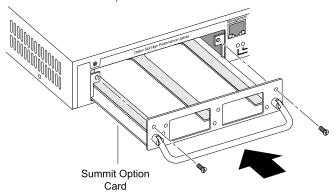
Installing a Summit Port Option Card (XGM-2xn Shown)
